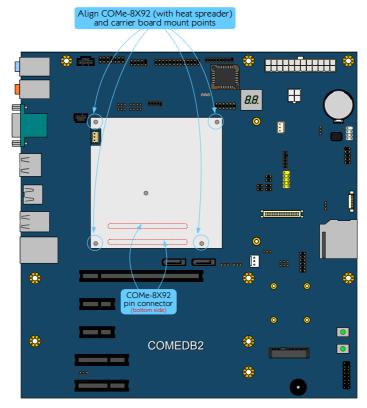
Aligning COMe-8X92 (with heats preader) and carrier board mounting points
